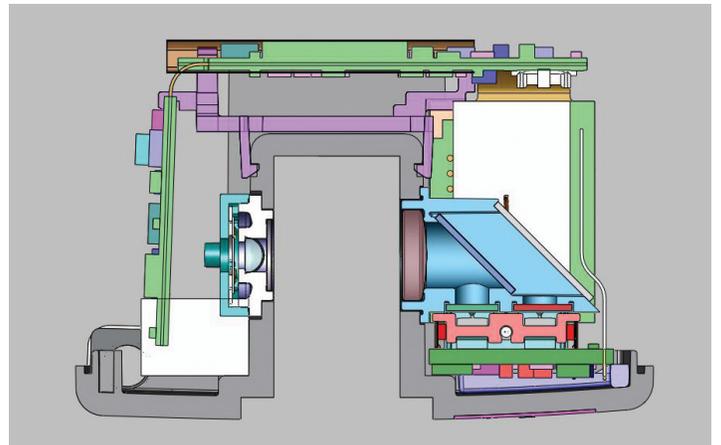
Cross-section of the CAPNOSTAT 5 assembly.
